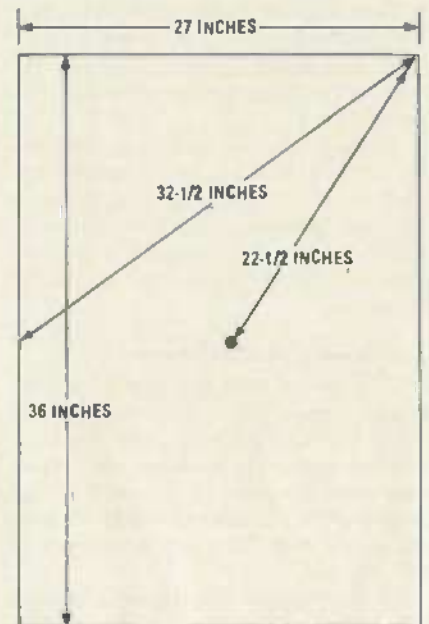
DIMENSIONS and turning radius of track drive mechanism.
